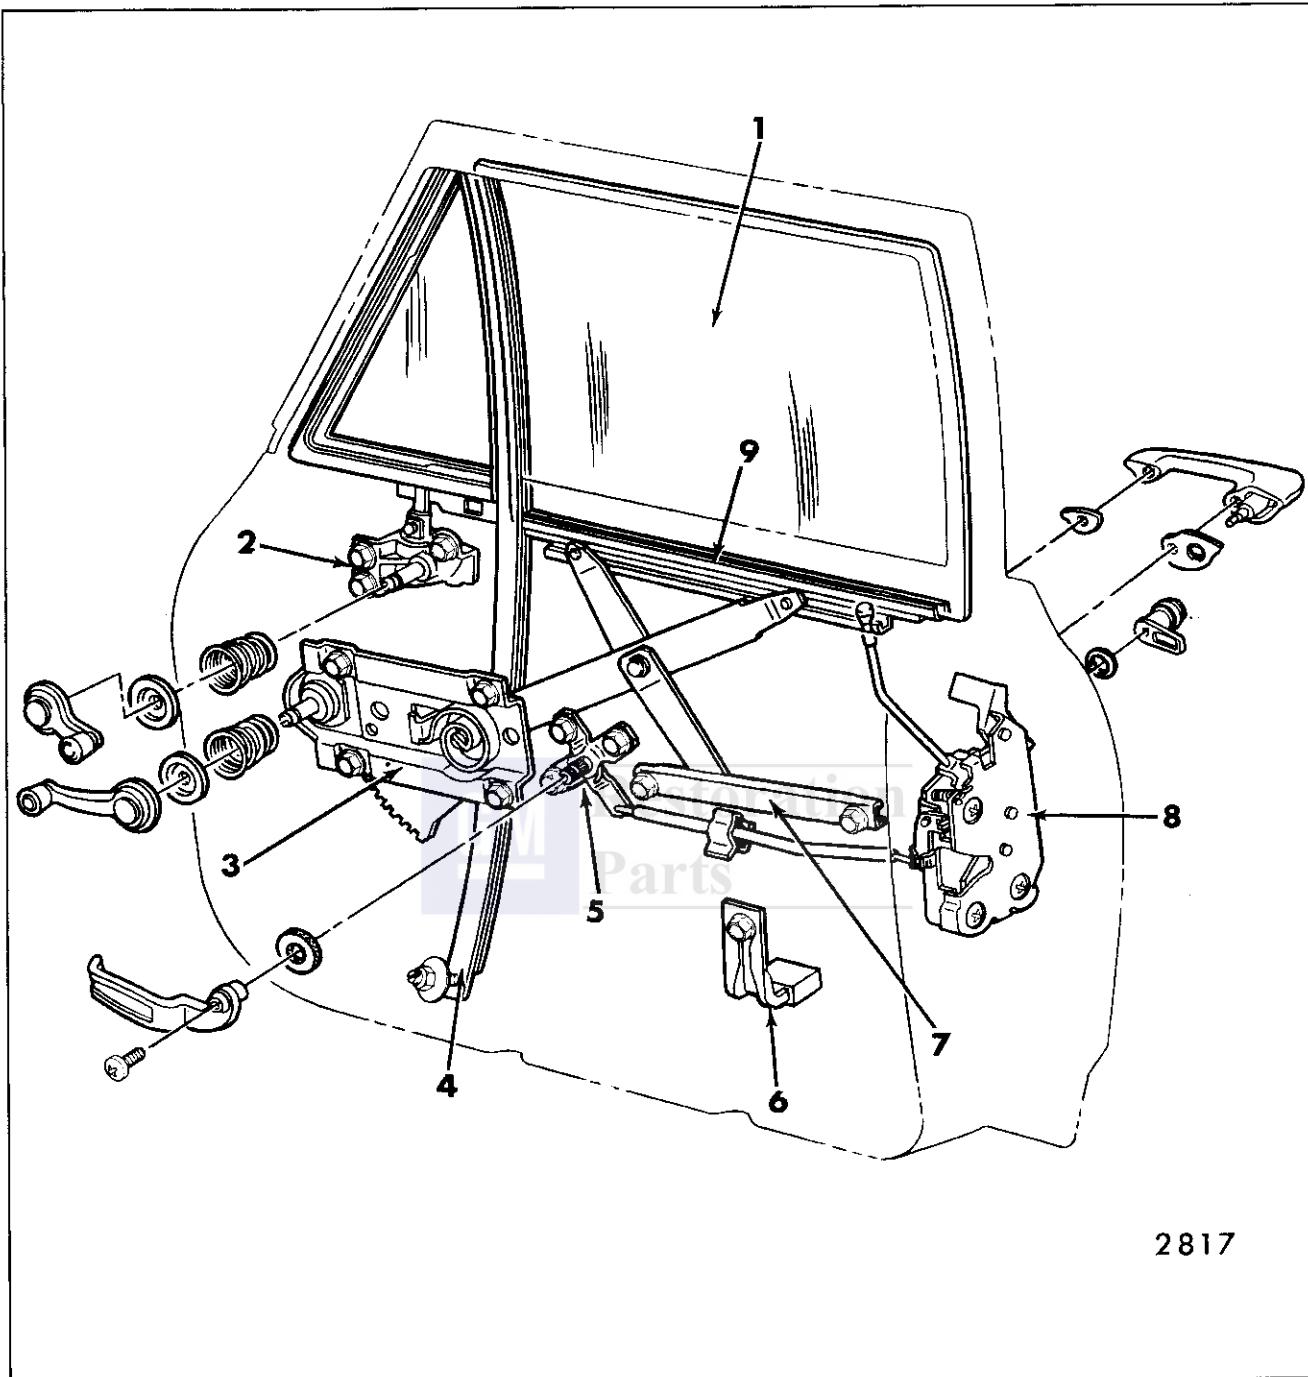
Front Door Hardware - "A" Closed Styles
